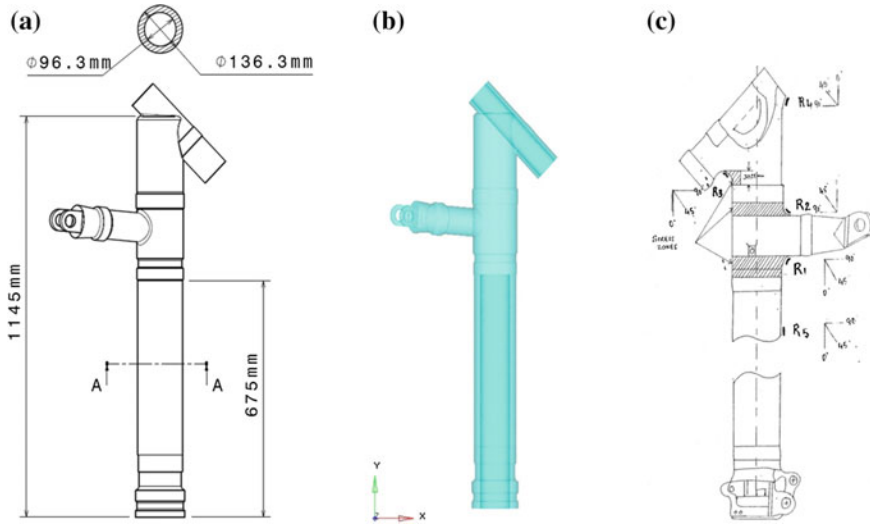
Geometric dimensions, CAD model and strain gauge locations of main landing gear cylinder
